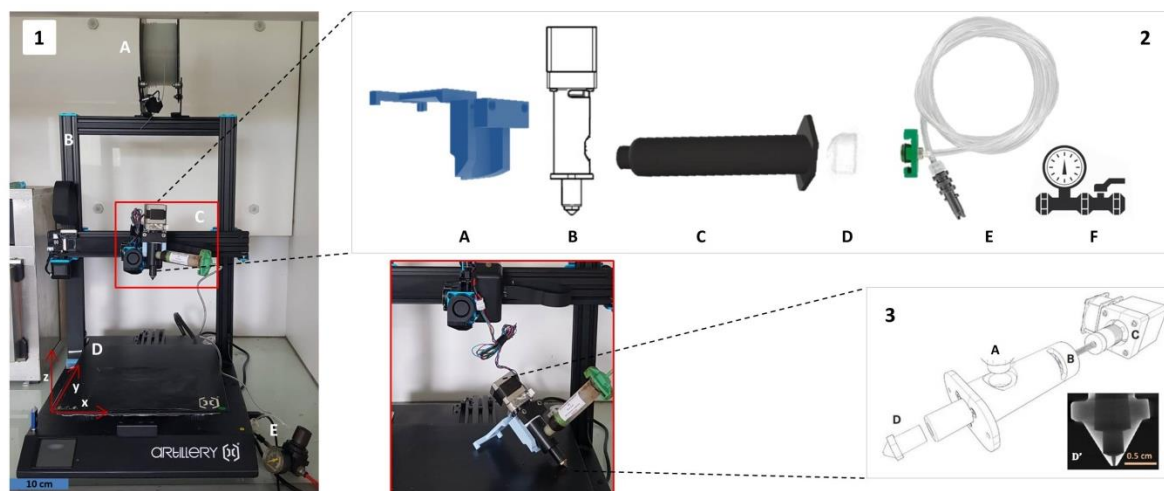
Photo of the modified 3D-printed Artillery sidewinder and the WASP extruder.
